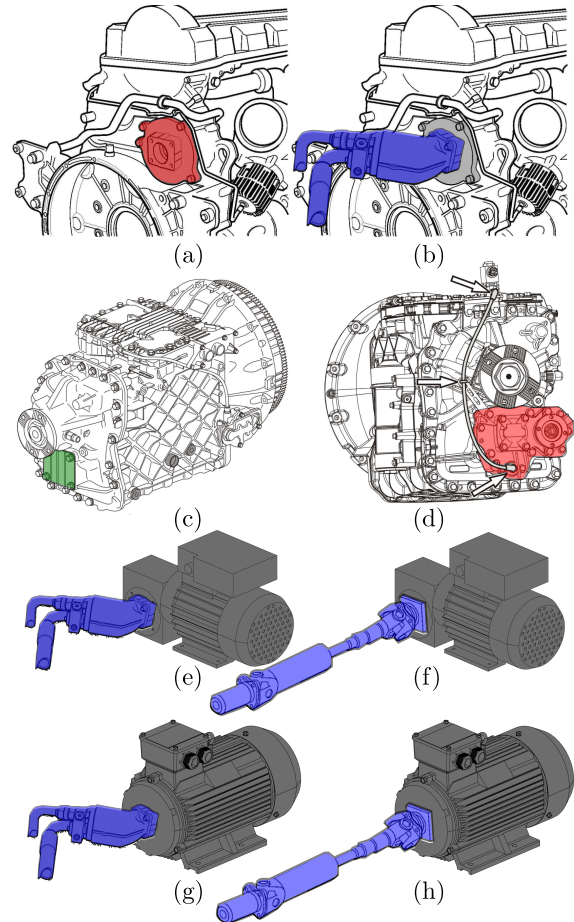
a) Diesel engine rear PTO mount; b) diesel engine with mounted hydraulic pump; c) Transmission with direct PTO mount; d) transmission with geared PTO [69]; geared PTO propelling hydraulic pump e) and universal joint shaft f); direct PTO propelling hydraulic pump g) and universal joint shaft h).
